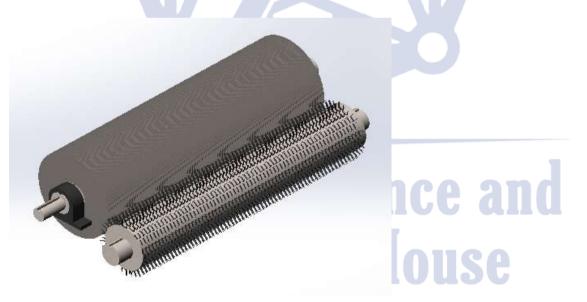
A view of a device that removes cotton fiber from saw teeth using a brush drum with a saw cylinder.
